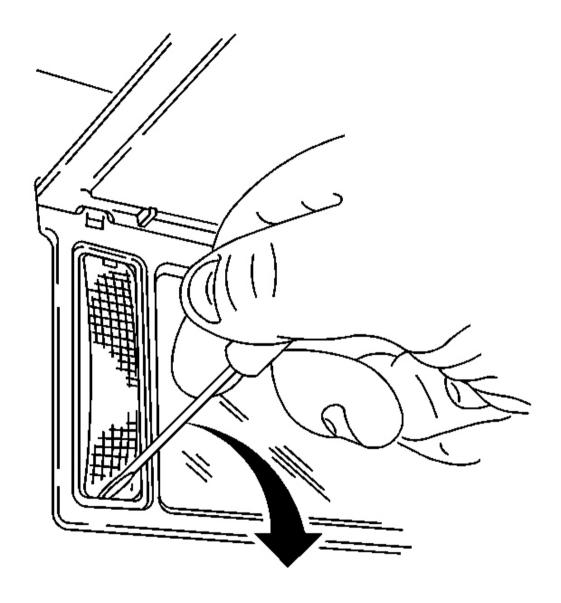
Lower Edge To Vanity Mirror Lamp Lens Courtesy of GENERAL MOTORS CORP.
